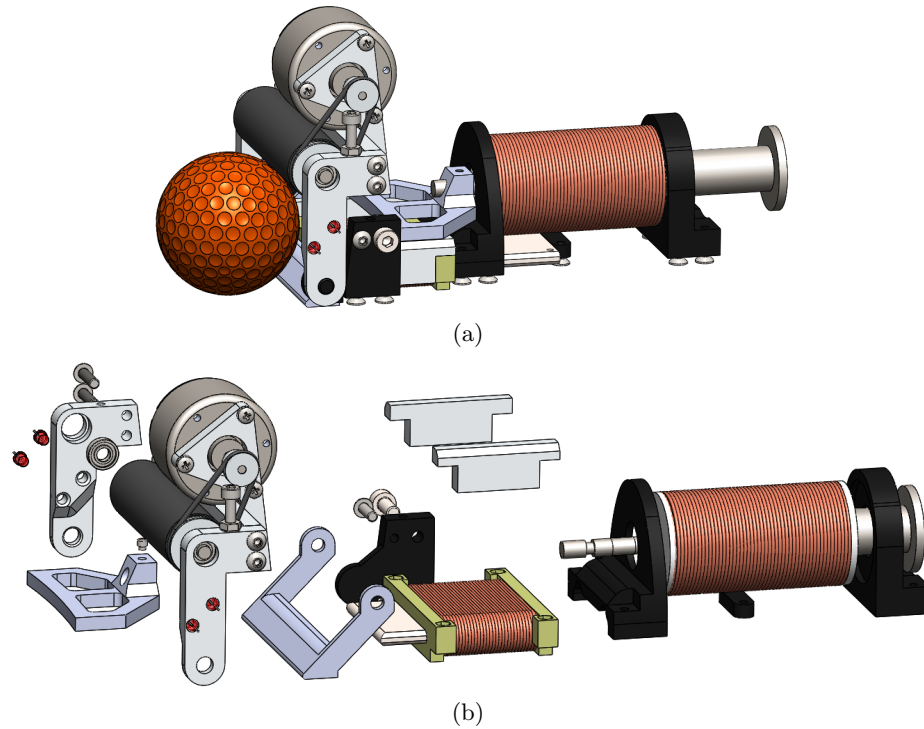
(a) Dribbler, chipper and kicker assembly. (b) Exploded view.
